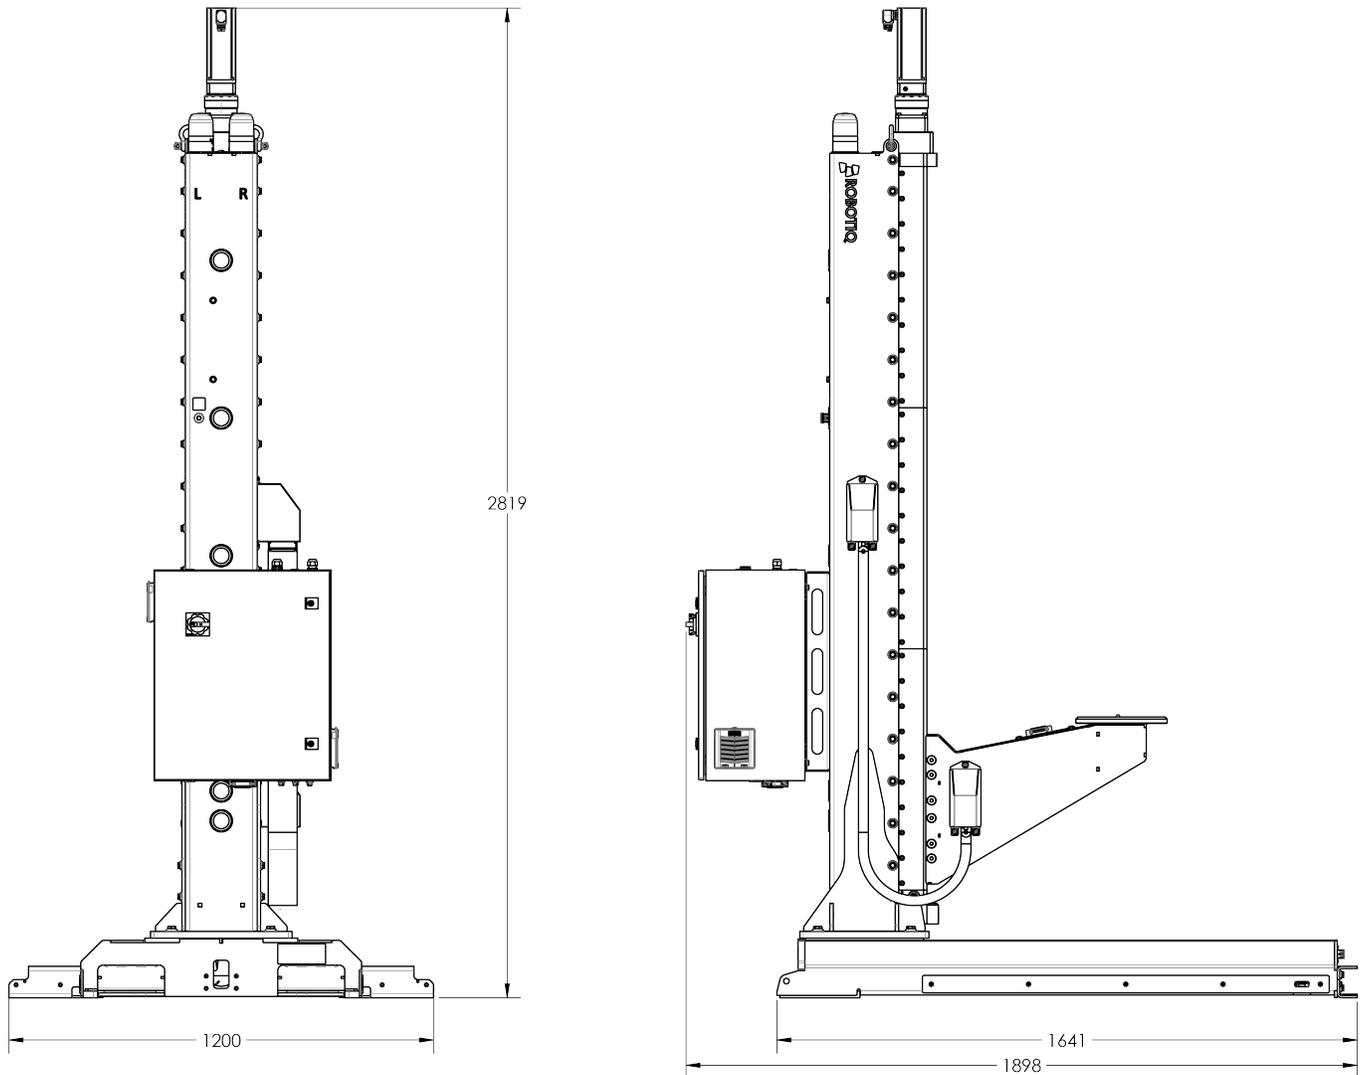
Linear Axis Base with Control Box- Technical Dimensions
